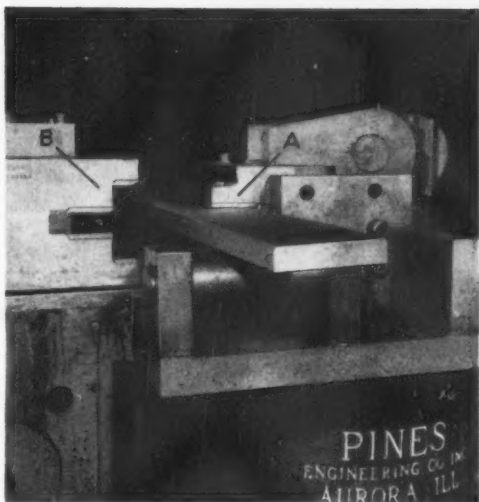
The Steel Blank, 1½ in. Thick and 5½ in. Wide, is Here Seen in Position on the Type 4 Pines Bending Machine
